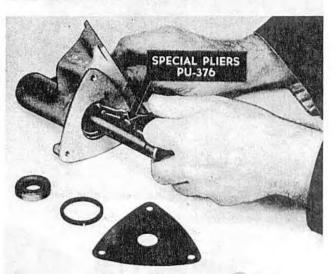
Retaining Ring Is Removed With Snap Ring Pliers
